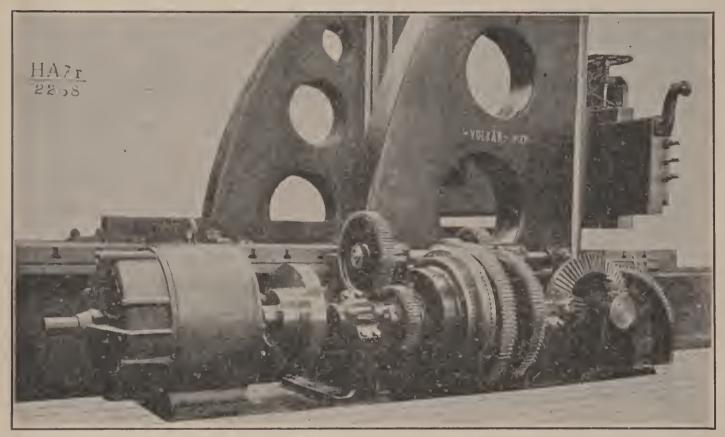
Heavy motor-driven planing machine with three eutting speeds and quick return, under test at Vulkan Works. Shows driving gear with electro-magnetic clutches, Vulkan patent.
